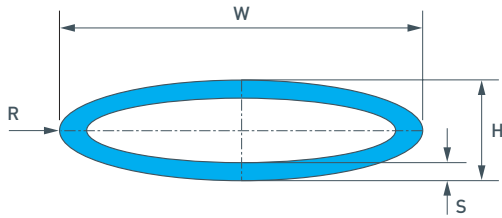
The greatest tube stress occurs at the narrow edge of the tube - R.
